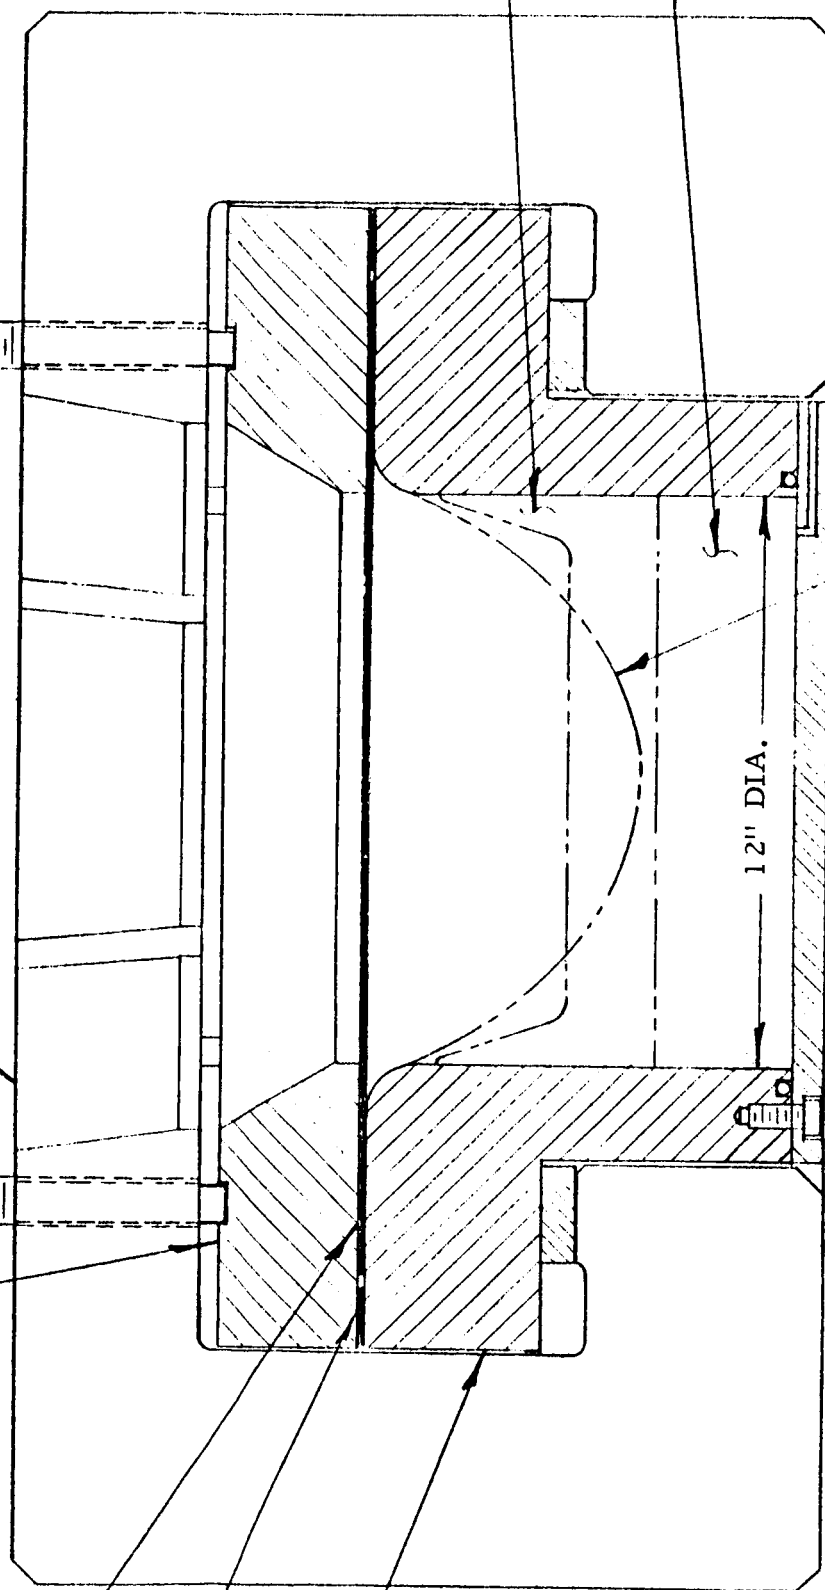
FORMING DIE - EXPLOSIVE FORMING
